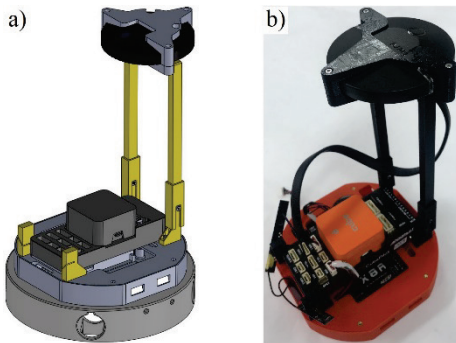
GPS holder: a) CAD model, b) 3D printed assembly
